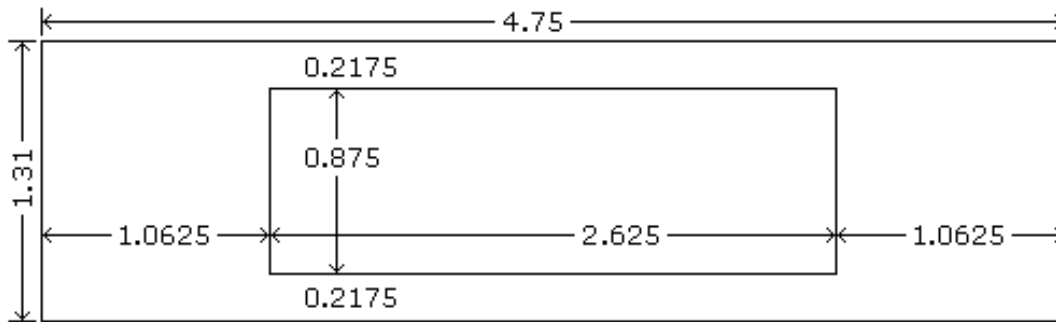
Window cutout in the case's front panel insert. Figure shows dimensions in inches: 2.625" = 67mm, 1.0625" = 27mm, 0.875" = 22mm, 0.2175" = 5.5mm.
